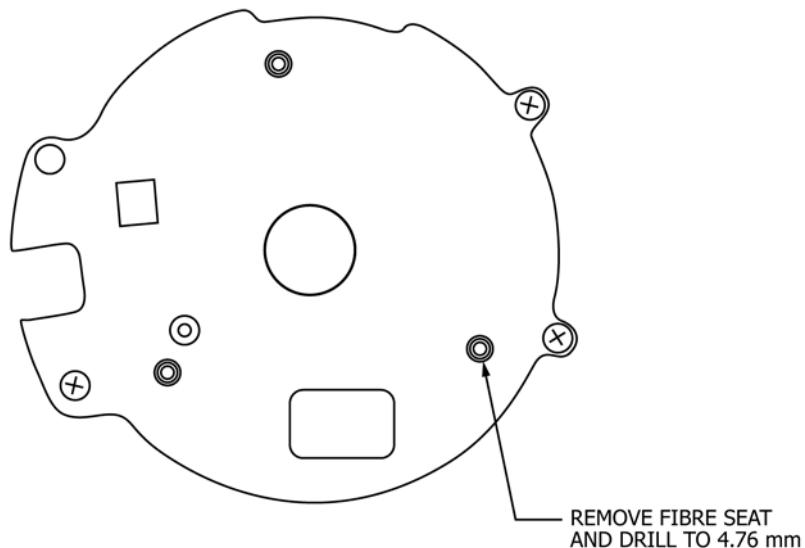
Modified Ford Distributor-Lower Plate Assembly
